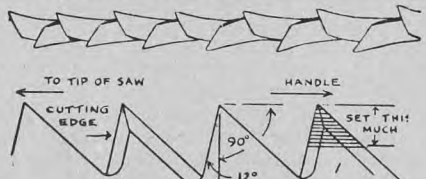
Crosscut handsaw teeth, showing angles and cutting points.
